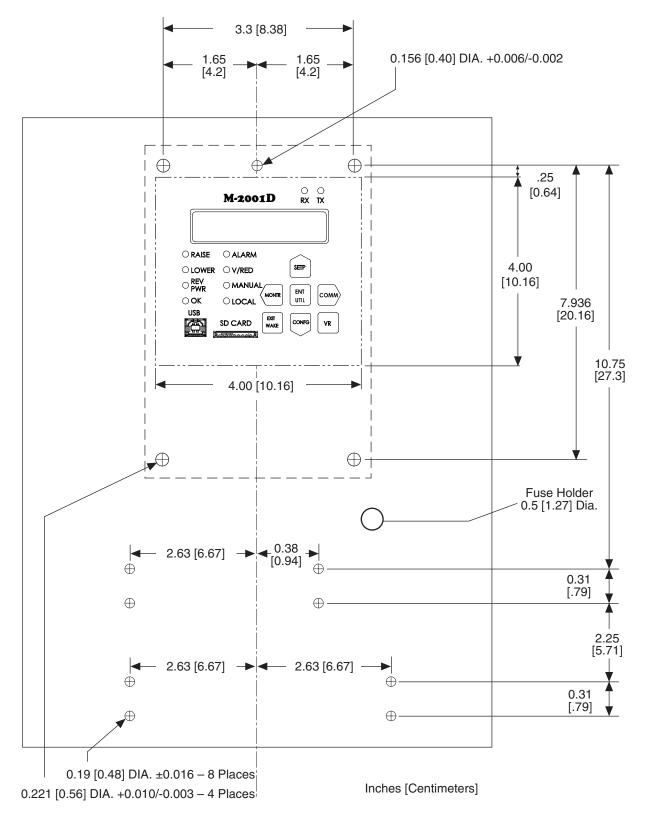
M-2051 Panel Cutout and Hole Drill Dimensions
